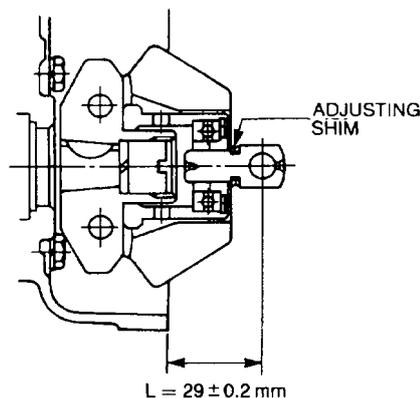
Shifter and Sleeve Assembly Setting Dimension
